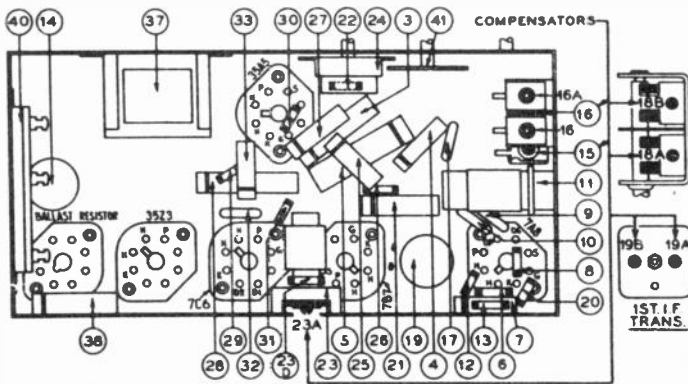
PART LOCATIONS, UNDERSIDE OF CHASSIS.
